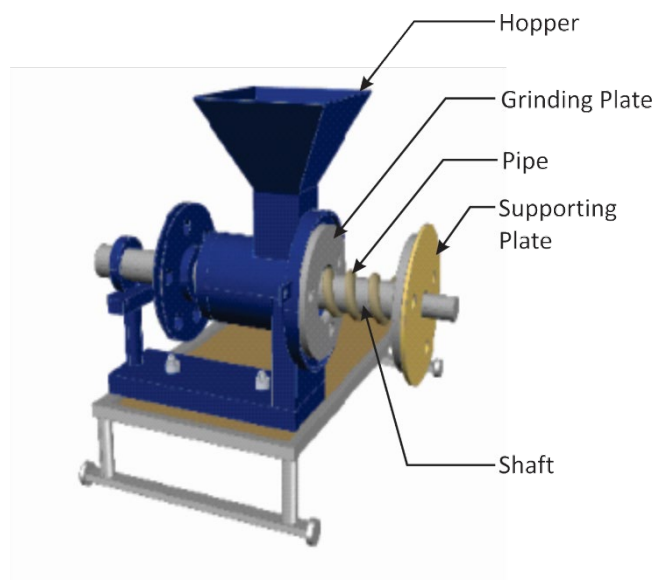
A partially exploded view of typical locally fabricated WGM showing key parts selected for analysis
